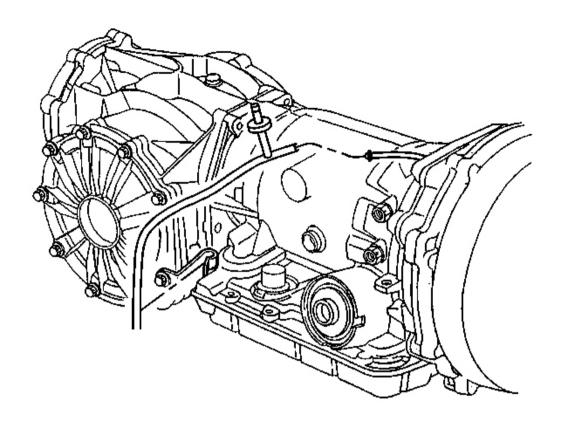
Transmission Vent Hose & Lower Retaining Clip Courtesy of GENERAL MOTORS CORP.
